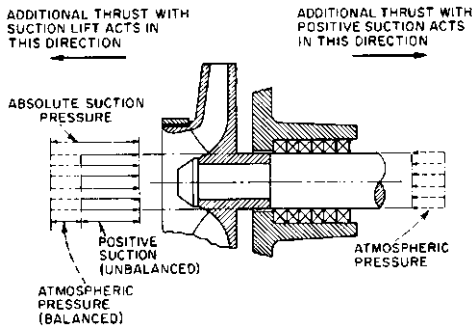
An axial thrust problem with a single-suction, overhung impeller and a single stuffing box or seal chamber
